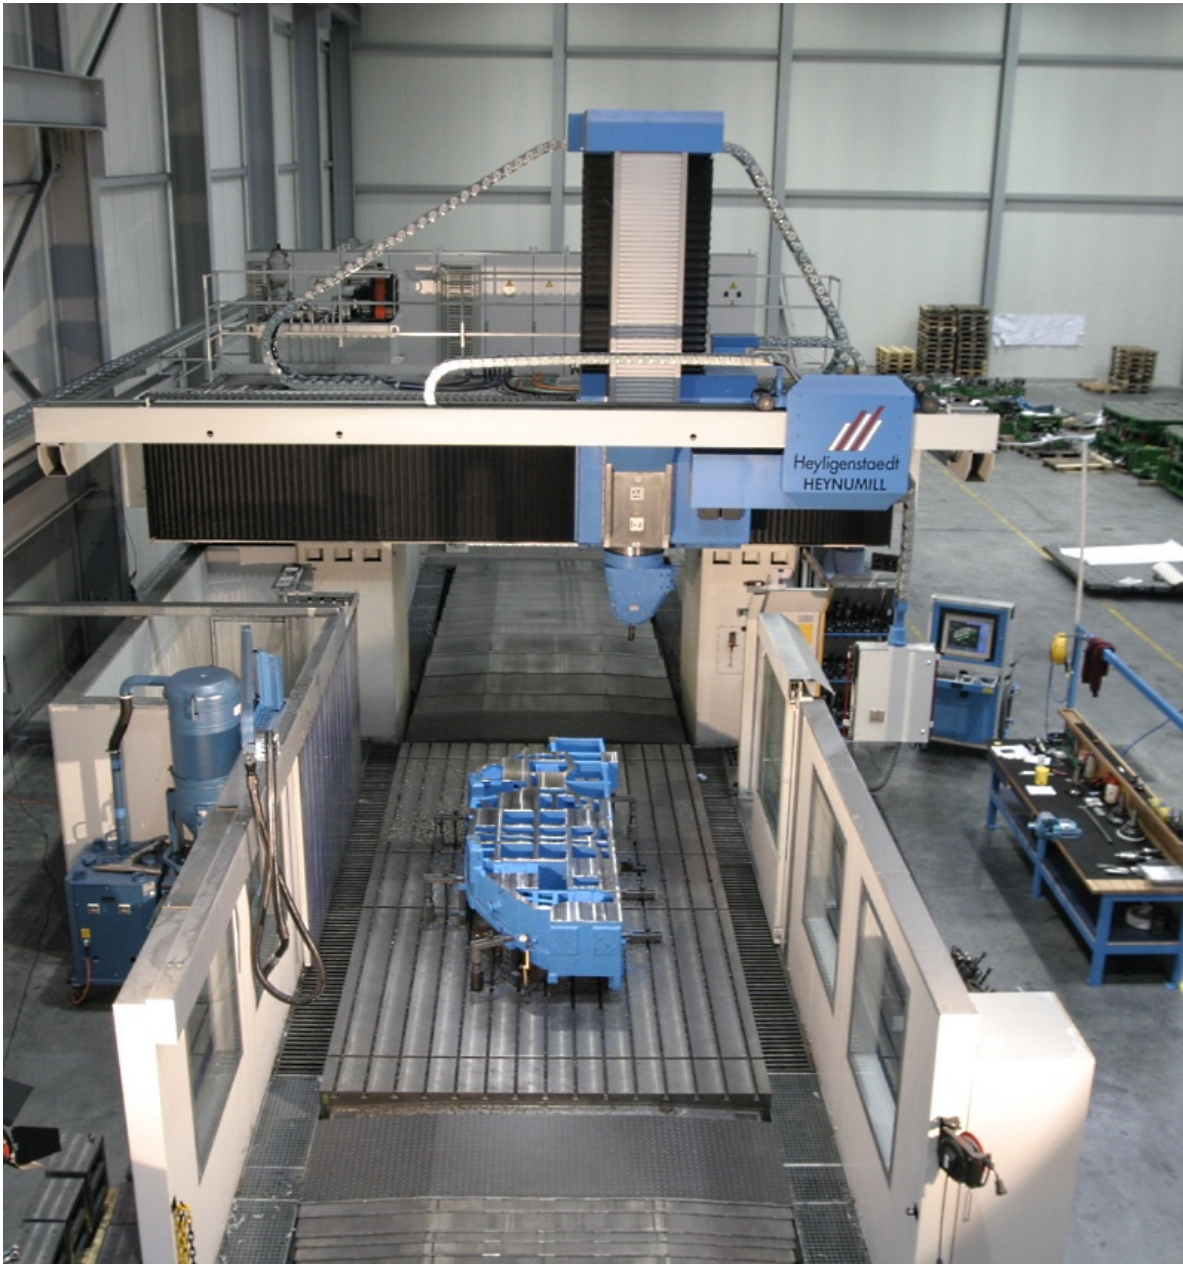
An industrial CNC machine used in the automotive industry — the Heynumill 3200 PF
